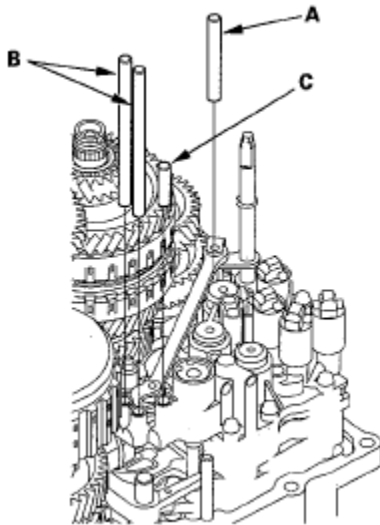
Identifying ATF Feed Pipes And Accumulator Body
